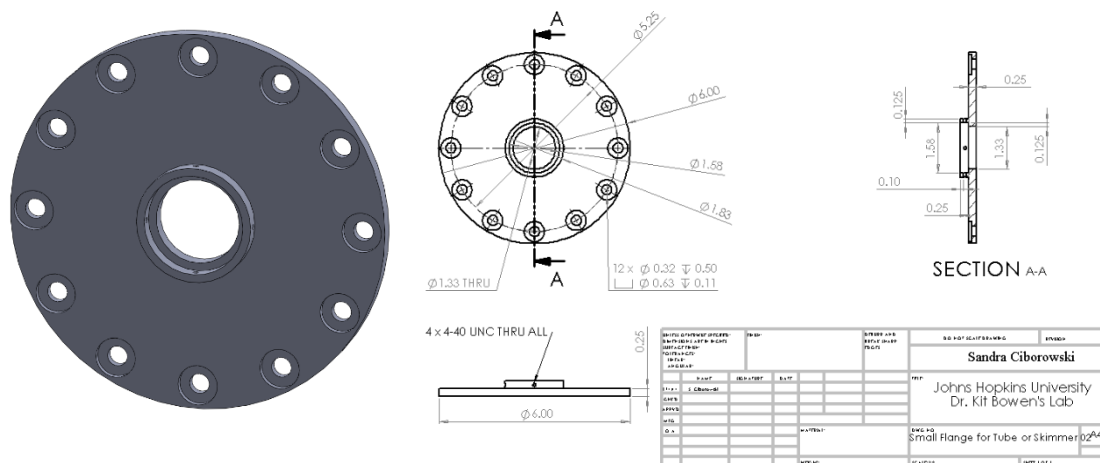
Base Flange for Skimmer design on PSA-RET Instrument.
